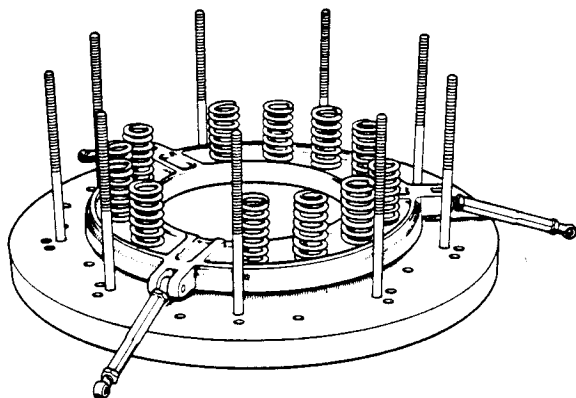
ASSEMBLING PTO PRESSURE PLATE
